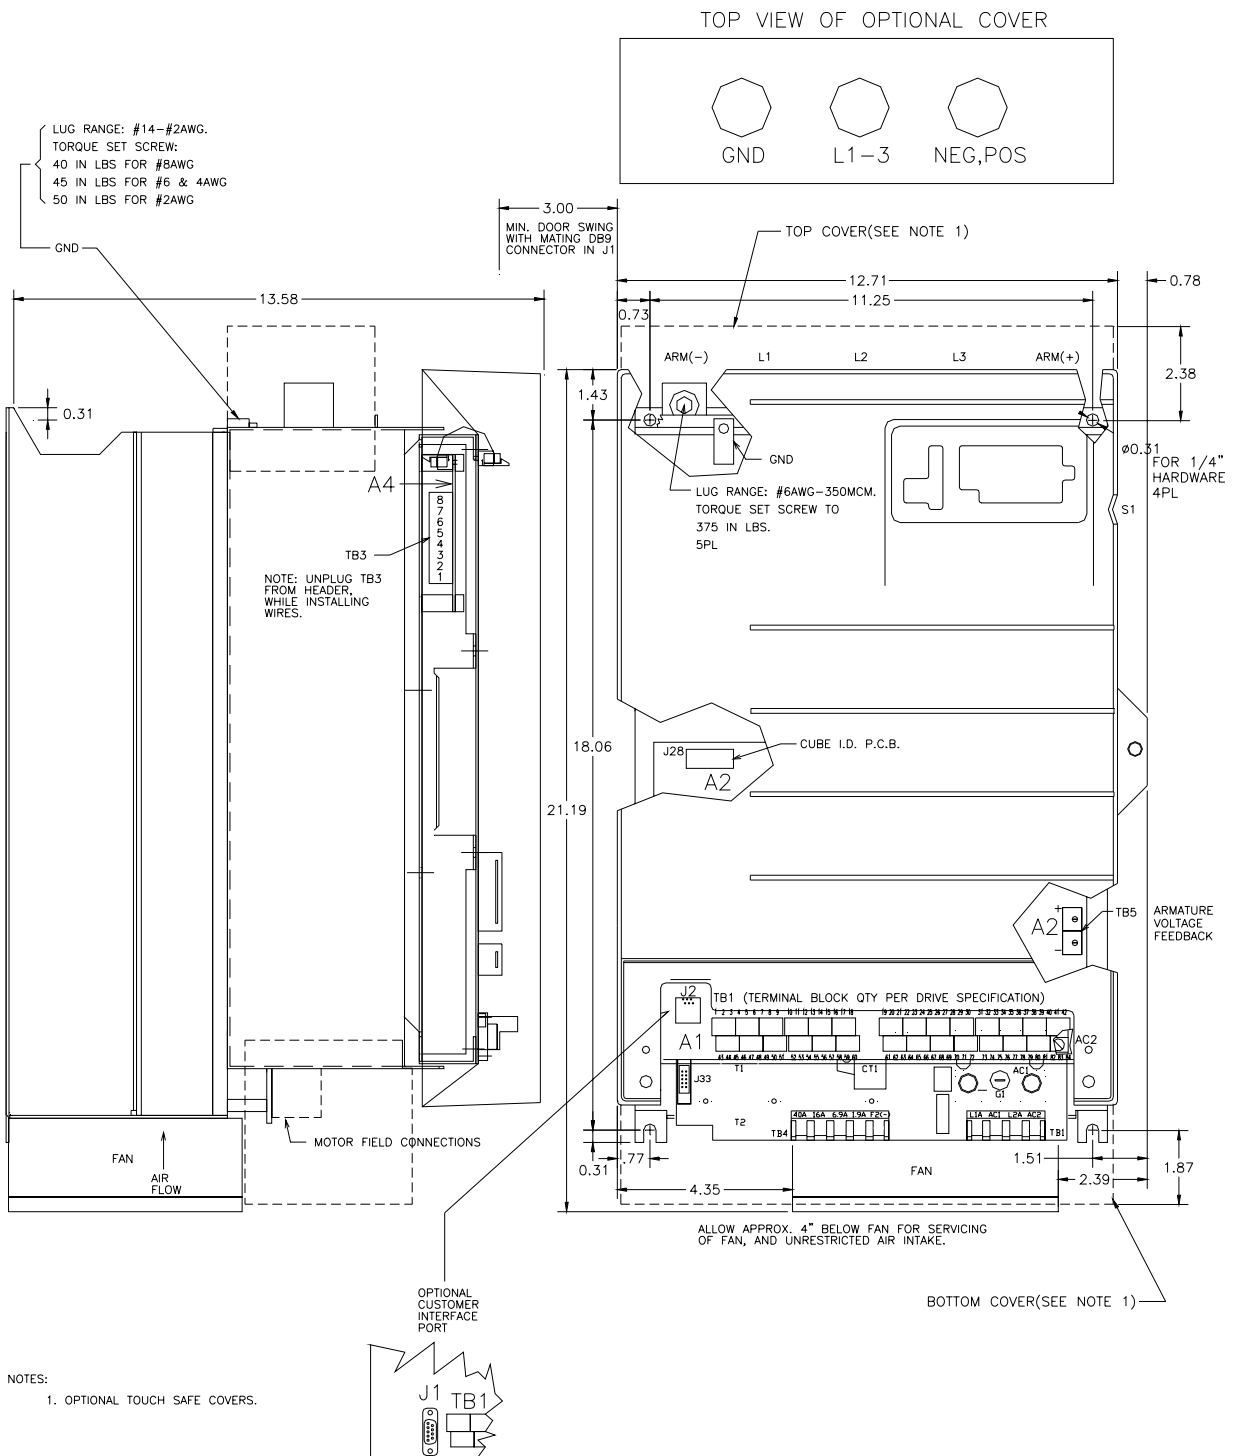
Drive Chassis Outline, DSD 412, 195 Amp
